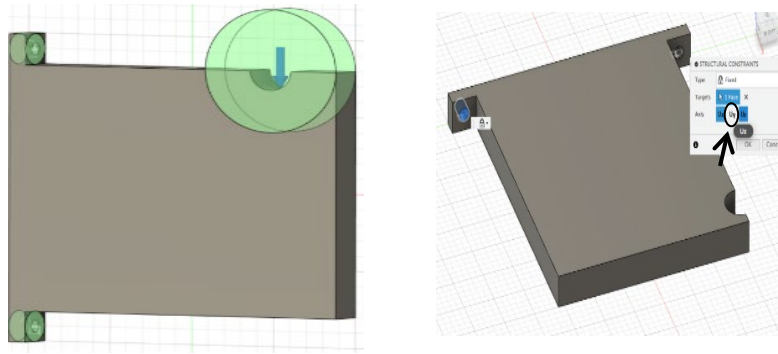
BC in both bolts holes surfaces except the y-axis in the lower hole surface.
